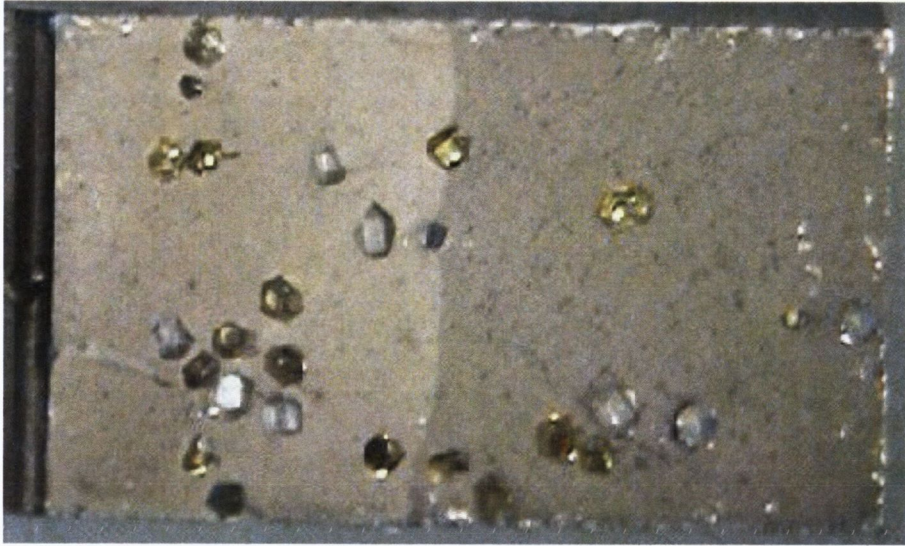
FastTrack Fracture Toughness fracture surface of specimen 40/45 DC10 showing diamonds present in the fast fracture failure surface, but with a diamond present at the interface between the fatigue crack and fast fracture. Run 19/5, mag. x 10.
